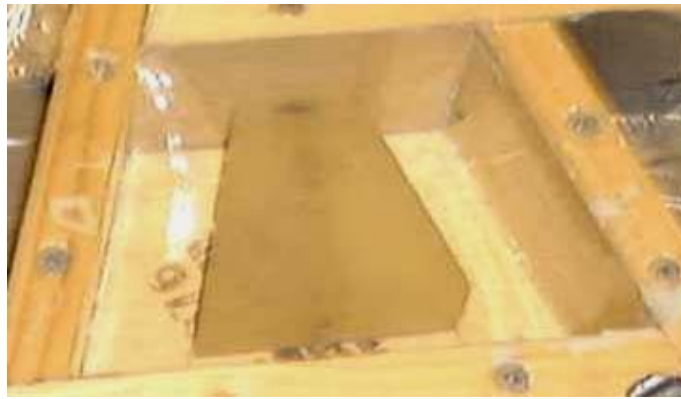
Wooden Form Containing Plug for End Tab Mold Casting.
